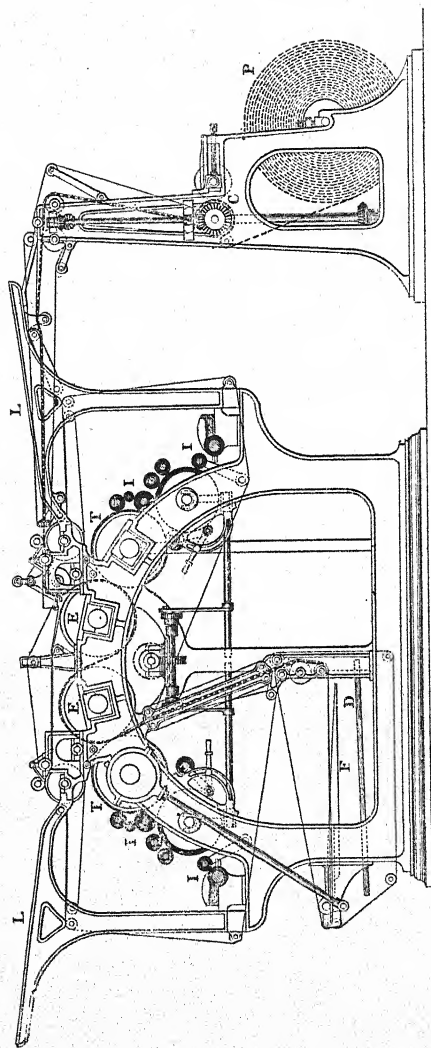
THE WHITEFRIARS SINGLE REEL ROTARY MACHINE.
